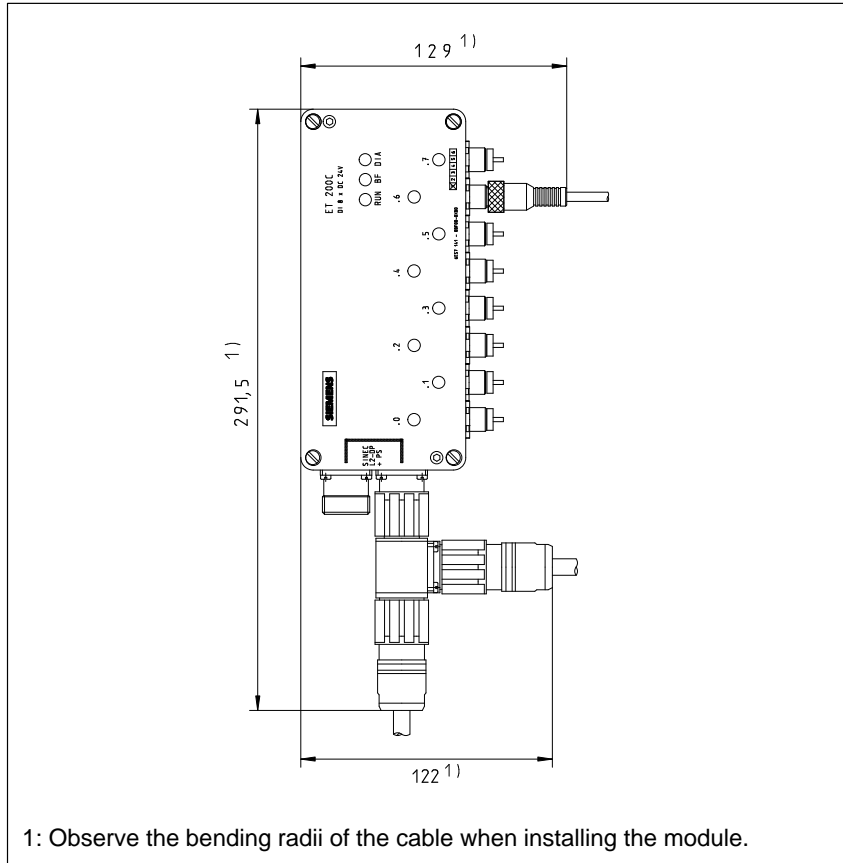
Digital Input Module ET 200C; DI 8 × DC 24 V; Dimension Drawing with T Connector and Plug Connectors (with Pin/Socket Inserts)
